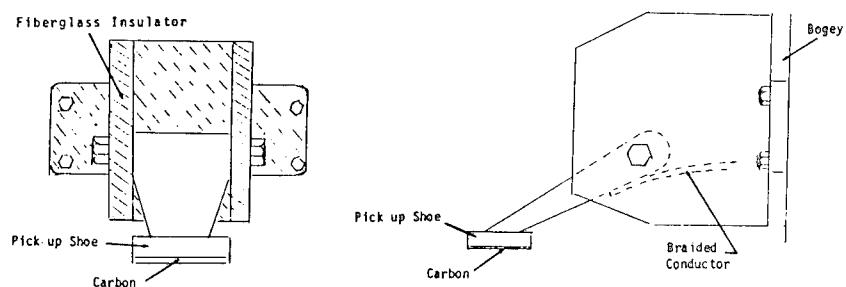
PICKUP SHOE MOUNTED ON FIBERGLASS STAND OFF
